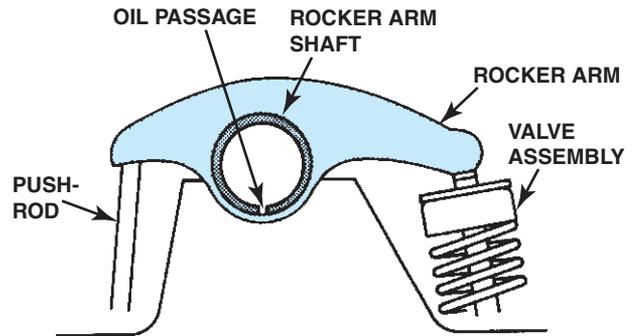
The rocker arm pivot is lubricated through the oil passage in the bottom of the rocker shaft. Other rocker arm styles are usually lubricated through a hollow pushrod.
